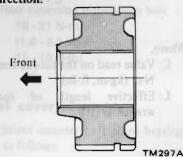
Installing OD-reverse Synchronizer Hub
